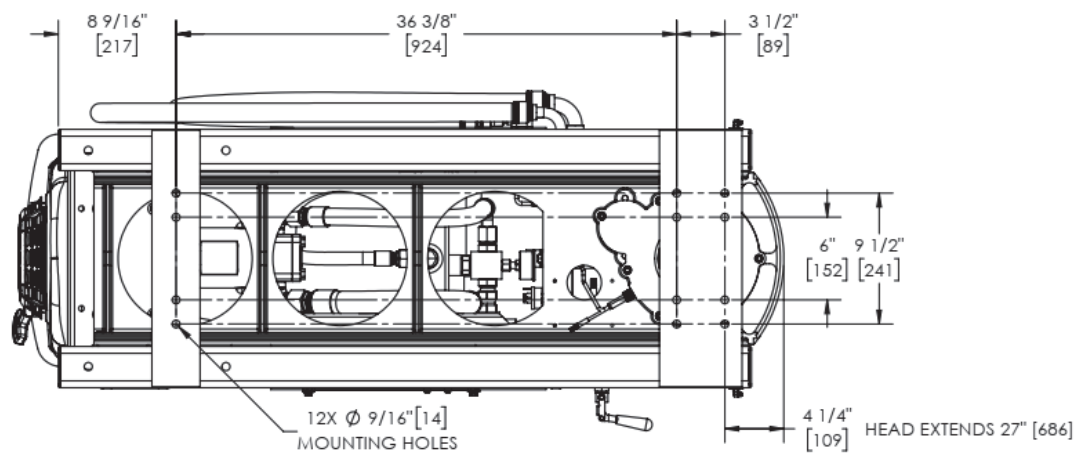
Mounting holes for 17-000-24. (Same for 17-000-22 and 17-000-27.)
